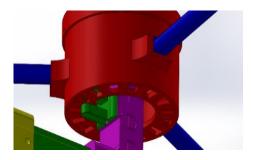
(b) The wind direction sensor sensing part is an encoder wheel with IR as a light sensor. This shows that the sensor unit.
